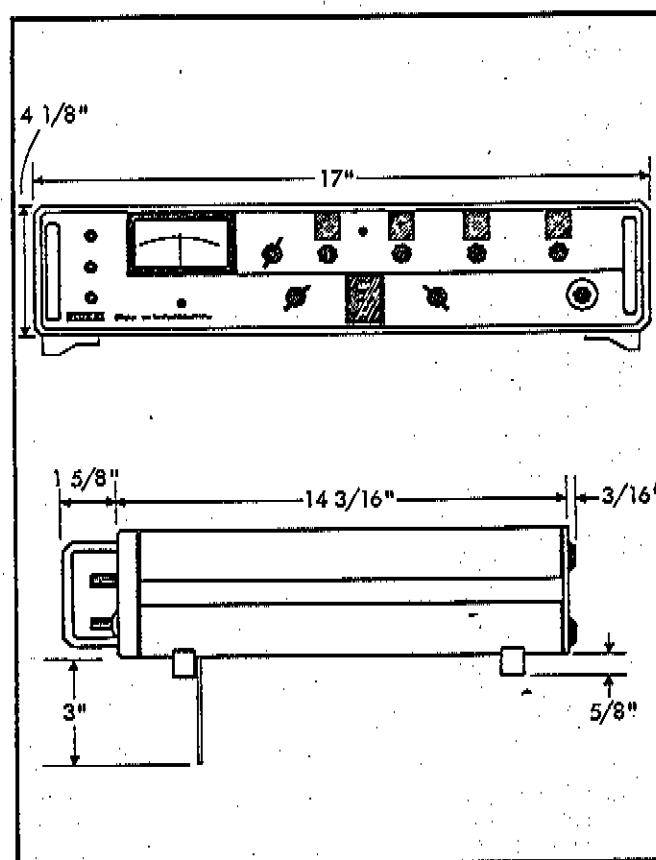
MODEL 893AR OUTLINE DRAWING
